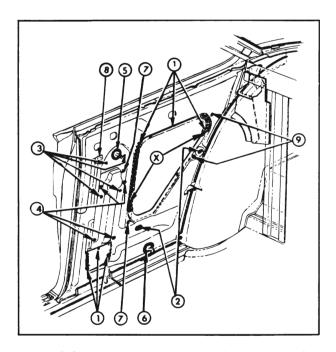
Quarter Inner Panel Sealing—"37" Styles
